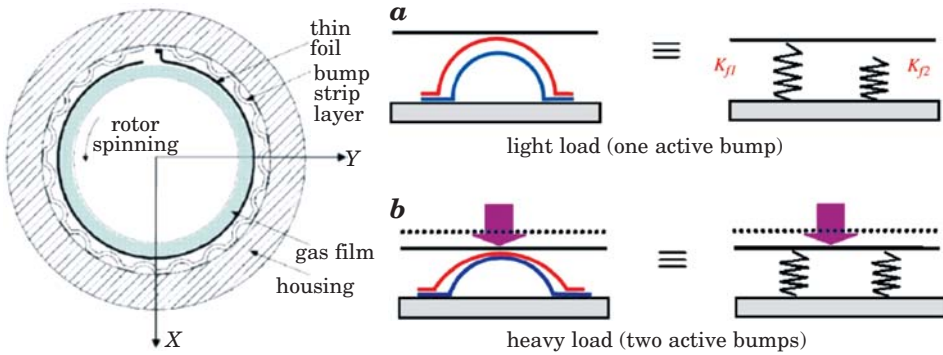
A schematic diagram of a bump foil bearing and a model bearing with a double bump foil layer
